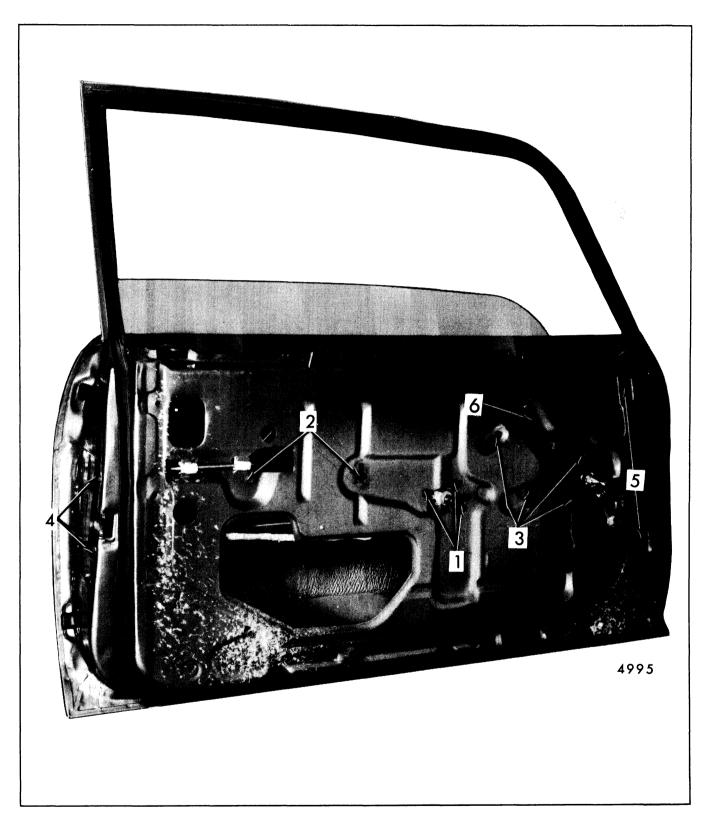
Front Door Hardware - "X-17,27,69" Styles
